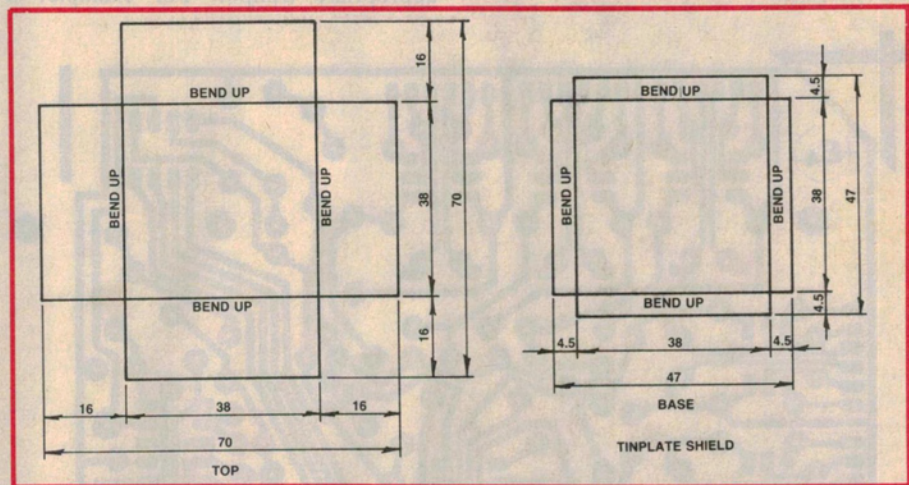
how to make the metal shield. The section at left goes over the top of the amplifier PCB while the section at right is fitted to the copper side.
